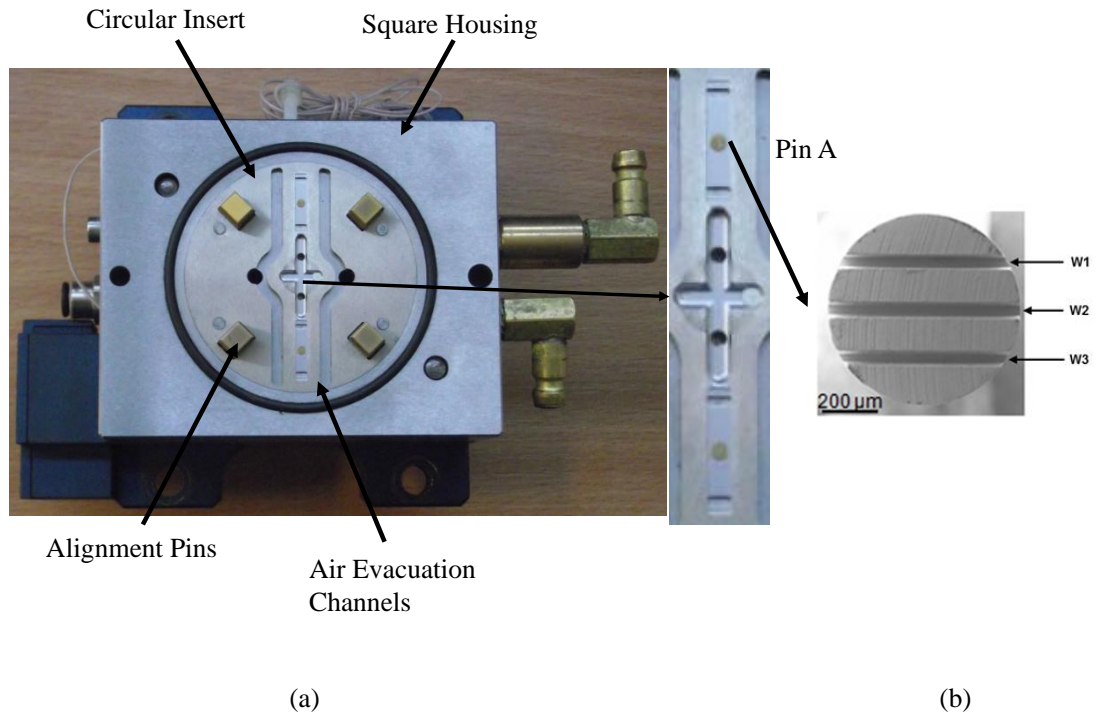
Picture of the mould (a) assembled mould and (b) pin inserts
